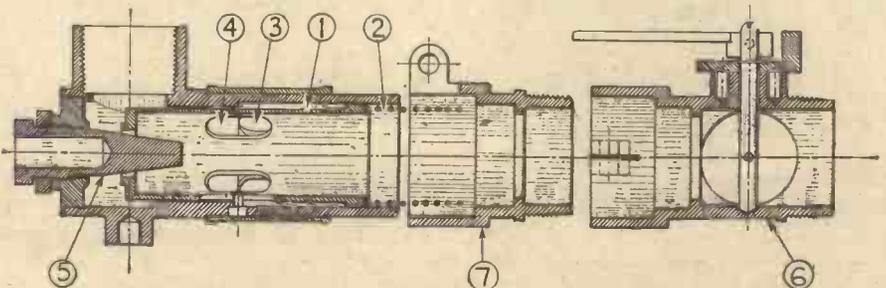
G.L.C. Carburettor No. 2, showing petrol carburettor adaptor (7) and butterfly throttle (6).
